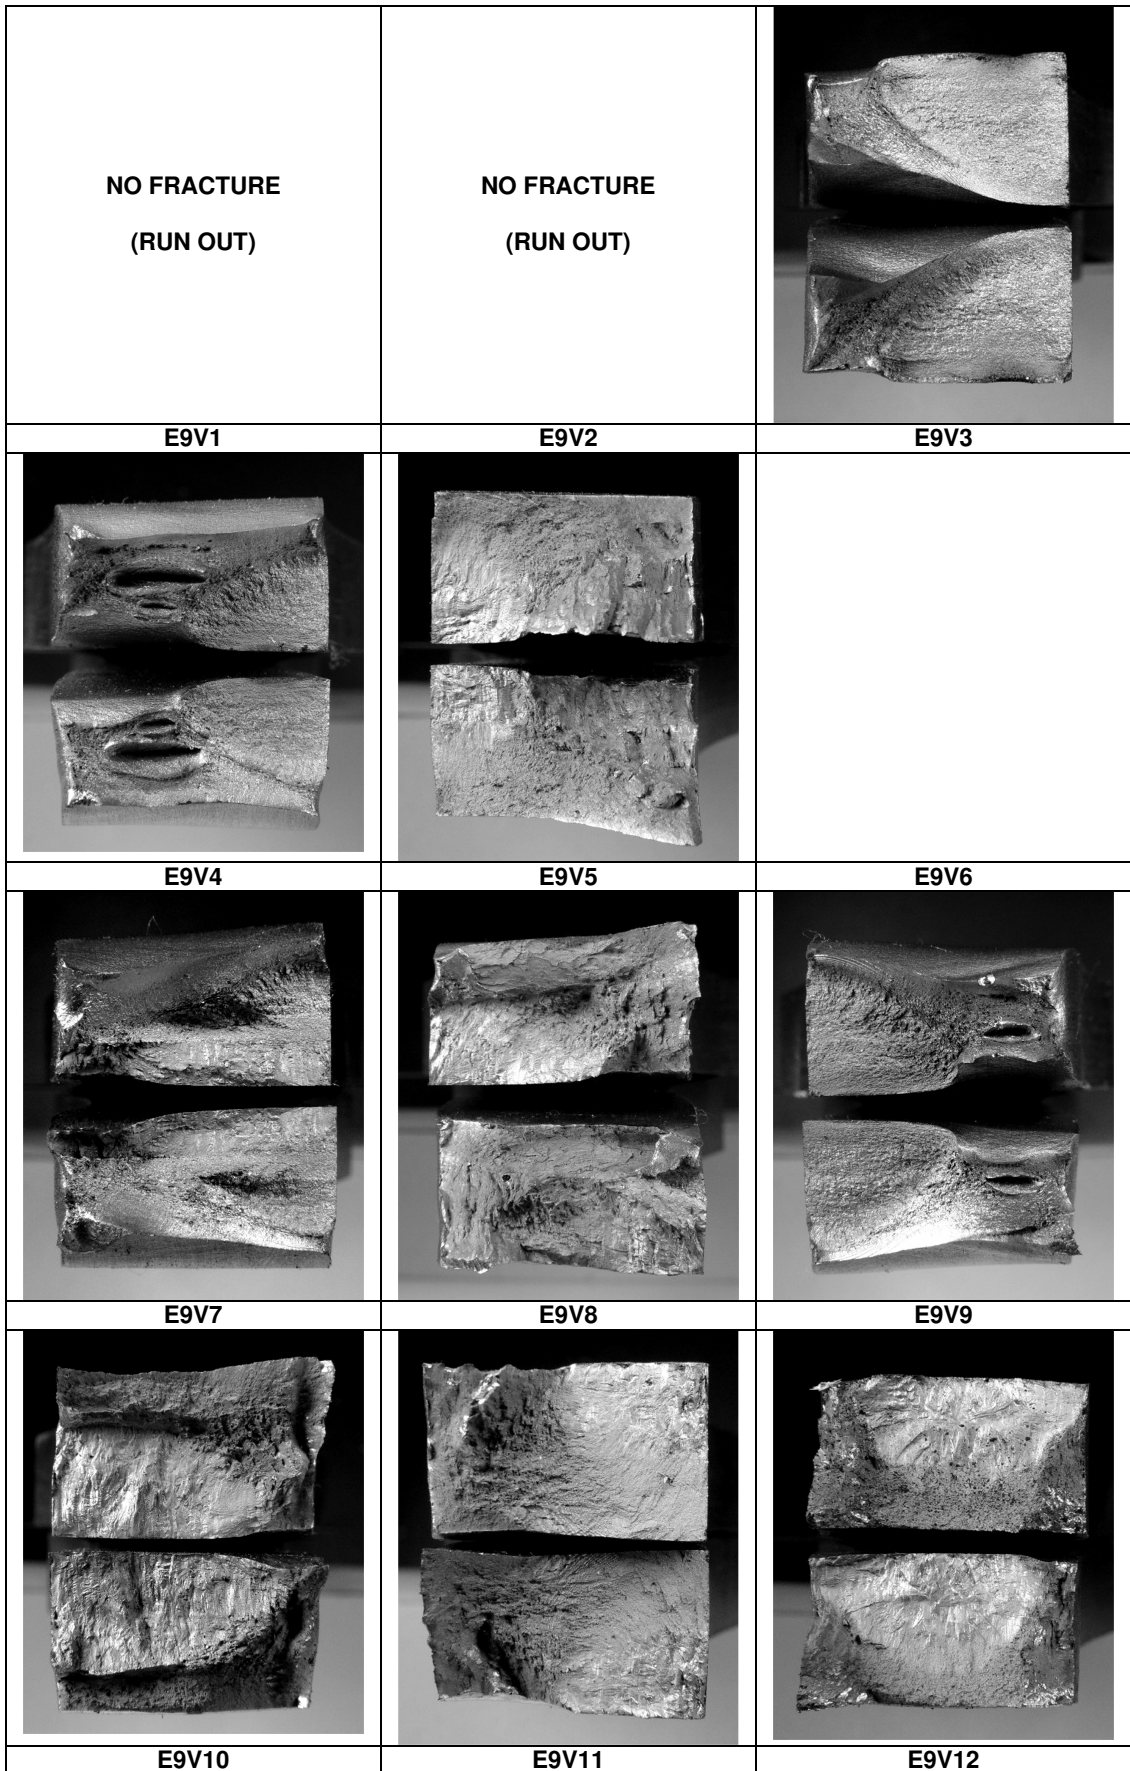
Fatigue fractographs of samples from 12 mm thick SAW weld (E9).
